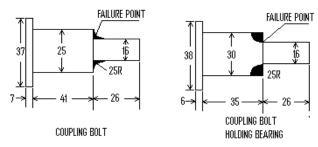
, COUPLING BOLT AND COUPLING BOLT HOLDING BEARING
